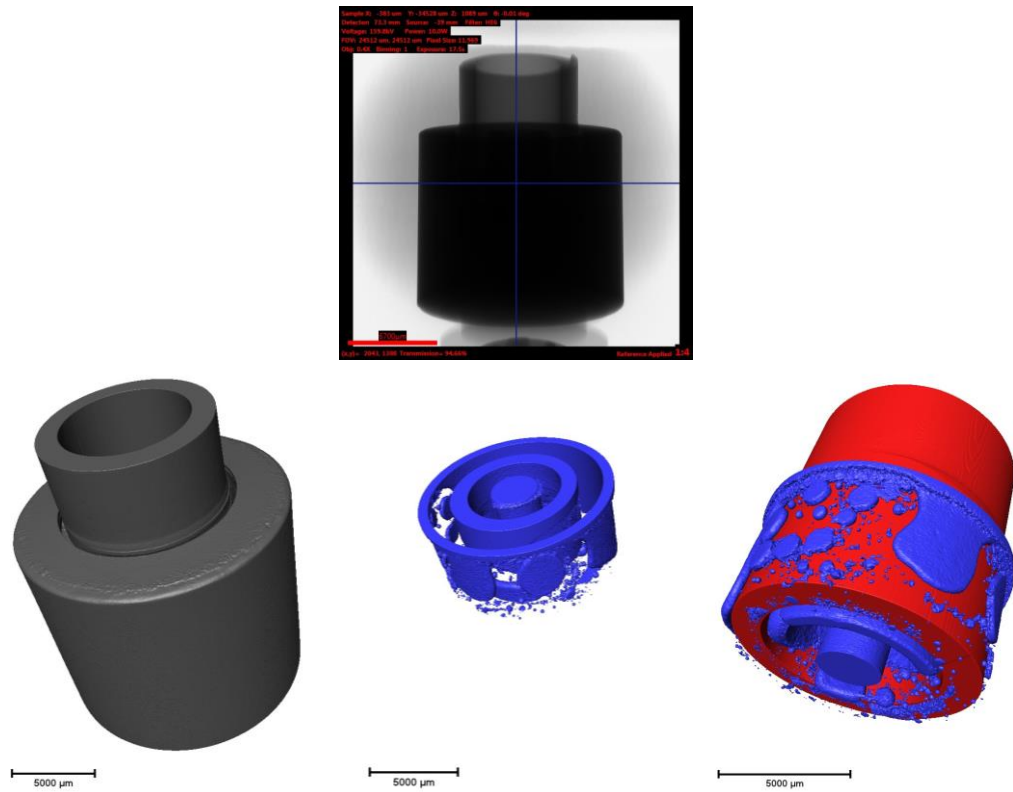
Complete OTM tube cap showing holes (blue) around the tube (red) inside the glass sealing.
